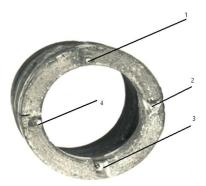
Diamond core drill with traces of the pre-burning-in: 1 - Aluminum fusible insert; 2 - brass fusible insert; 3 - lead fusible insert; 4 - tin fusible insert
